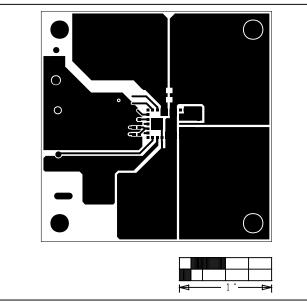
MAXM17503 EV Kit PCB Layout—Component Side
